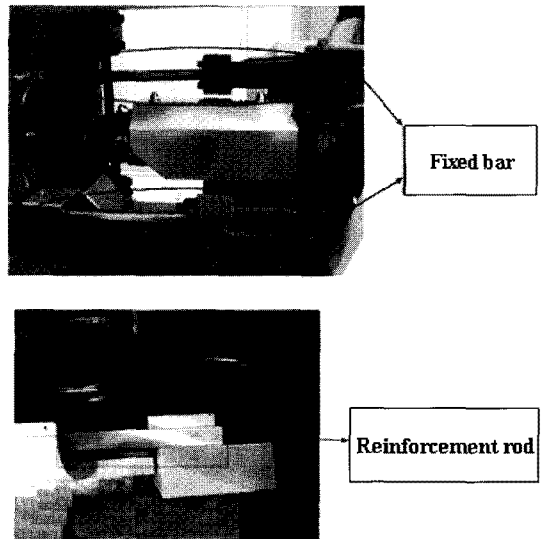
The pictures of reinforced injection unit of high speed injection molding machine
